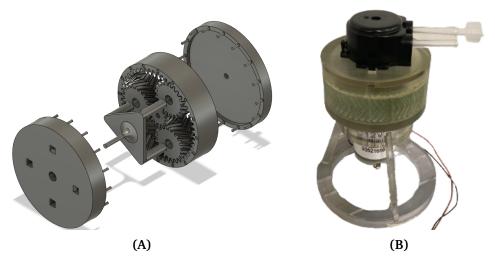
(A) Exploded CAD assembly of the planetary gearbox. (B) Assembled planetary gearbox mounted on a DC motor with a peristaltic pump and 3D-printed mount.
